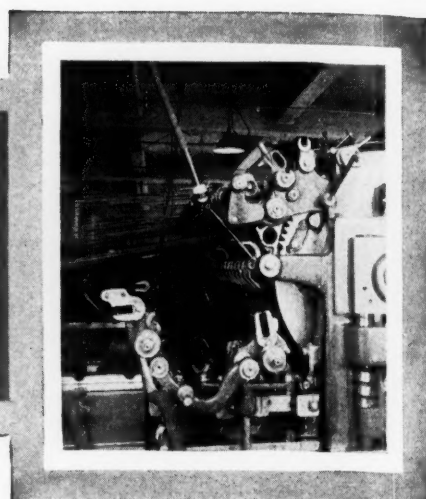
Electric Nut Setter with 18-inch Extension Rod Used for Tightening Cap-screws Holding the Headlight Bracket to Frame
